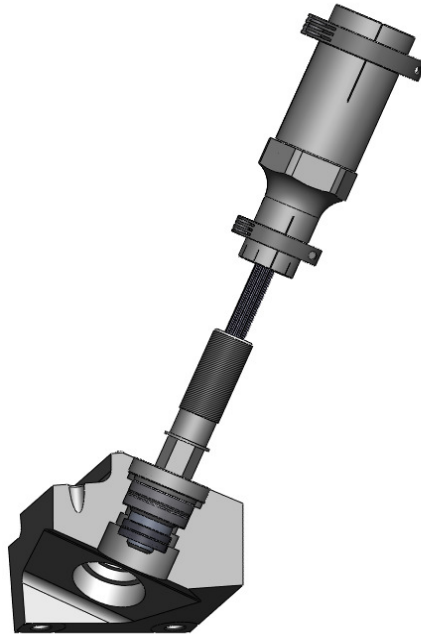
10223-DT-459 is threaded onto 10223-DT-458 as shown. 10223-DT-015 is sectioned such as to show the fully assembled and properly preloaded bearing assembly [24].
